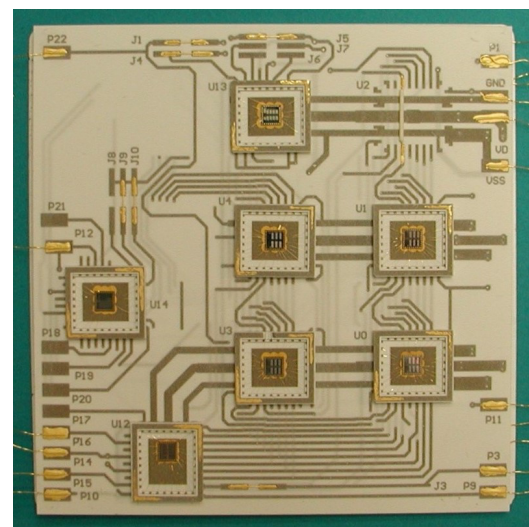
Photo of 11 cm x 11 cm prototype ceramic circuit board with packaged Gen. 11 SiC JFET-R chips (prior to attaching lids) in preparation for upcoming 460 °C, 91 atmosphere Venus chamber testing [5].
